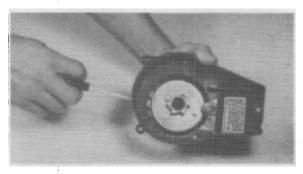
Checking pull cord for proper spring pressure if spring pressure is weak and an adjustment will not work (Fig. 29), it will be necessary to replace spring.
